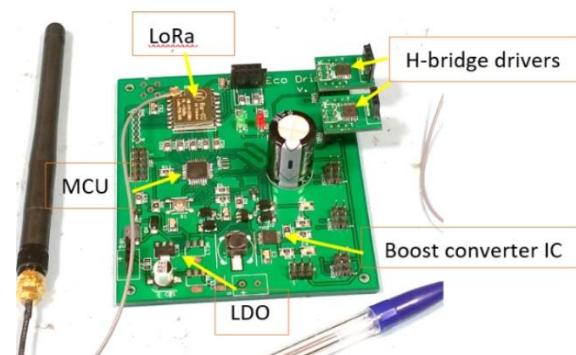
Assembled PCB of the wireless end-device (slave node).[25]
